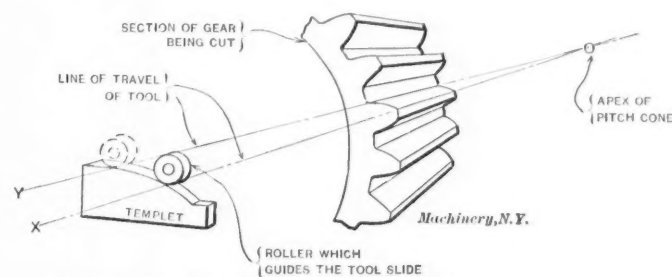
Diagram illustrating the Templet Principle for Forming the Teeth of Bevel Gears.
